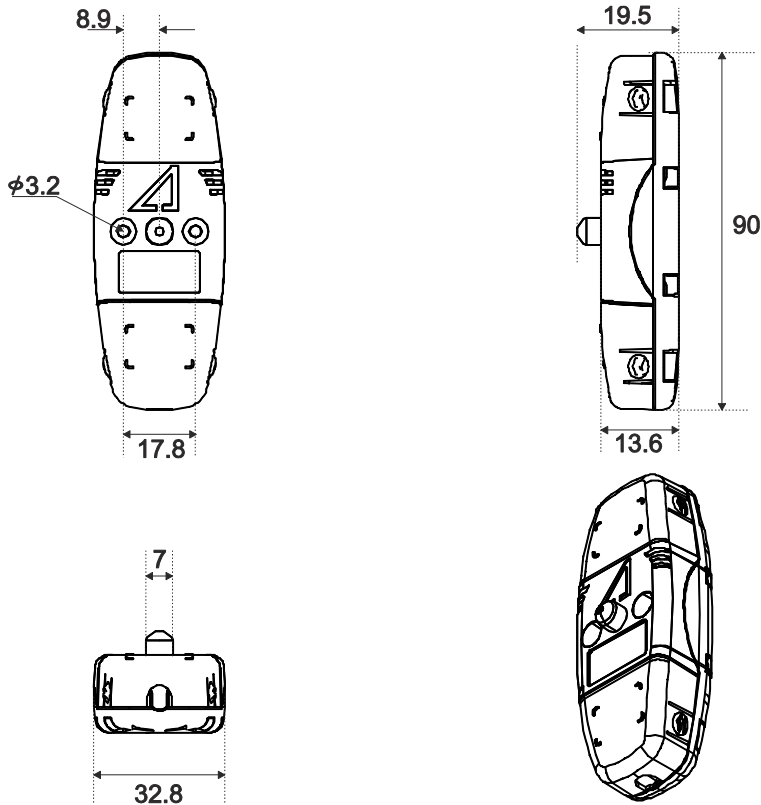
AQ01, AQ02 sensor dimensions, all dimensions in millimeters.
